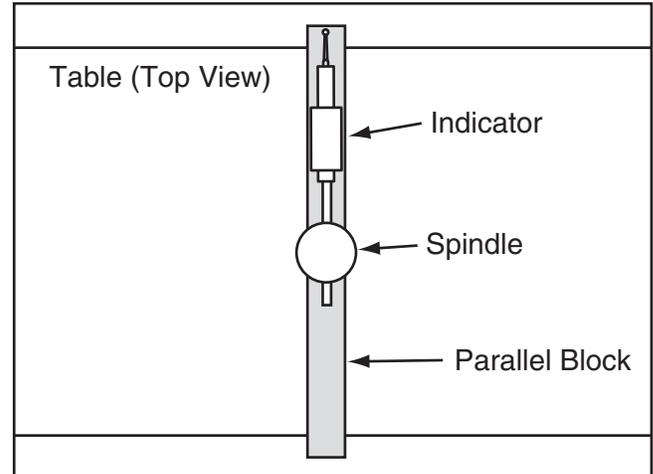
Parallel block and indicator positioned for the Y-axis measurement (top view).
